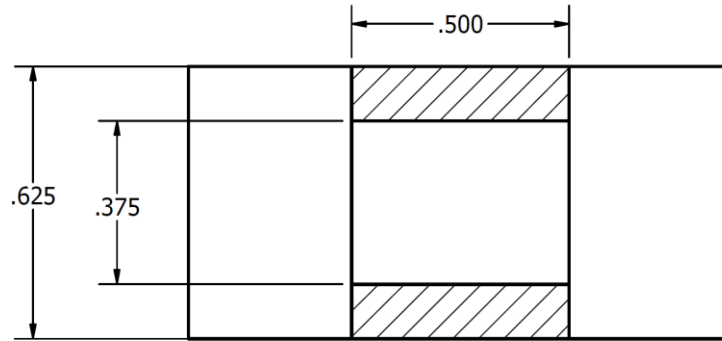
PAM SGBT Spring Element Cross Section (units are in inches)
